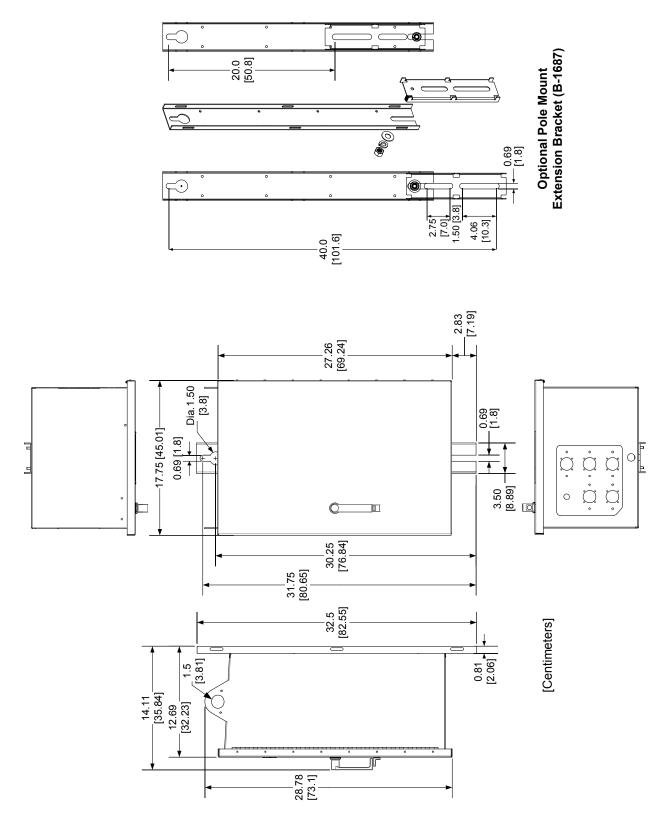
M-2979 Recloser Control Cabinet Dimensional Drawing
